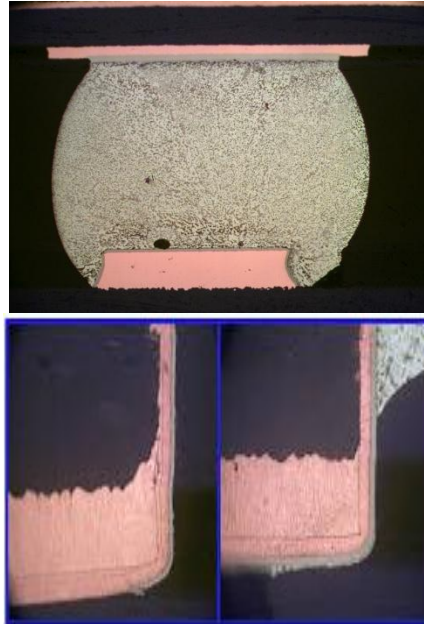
Cross-sectional views of soldered PCB joints showing solder fillet formation and interfacial structure [45].
